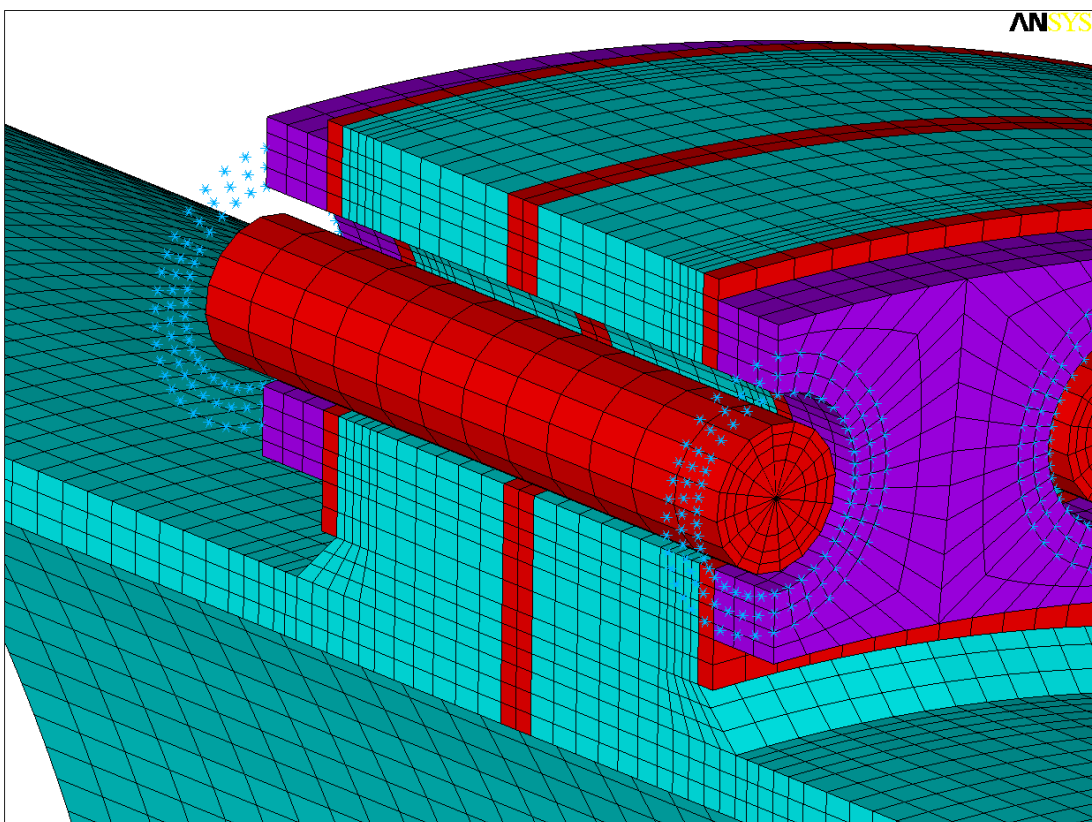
Back to Back Flange Model Mesh for FE Analysis – Section View with Fastener Detail
